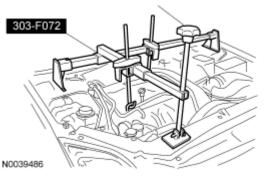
Identifying Special Tool (303-F072) Courtesy of FORD MOTOR CO.
